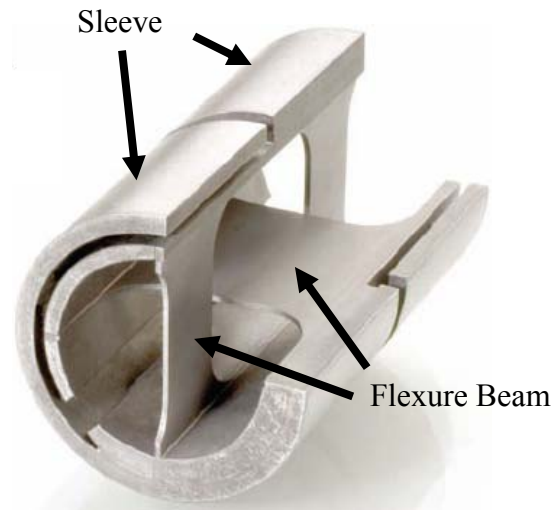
Cutaway of Cantilever-Type Flexure Bearing
